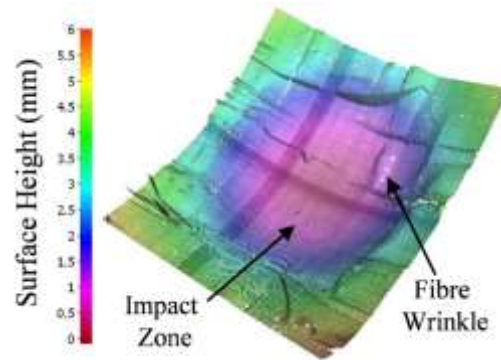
Surface scan of a 26-090 specimen prior to SEM imaging.
